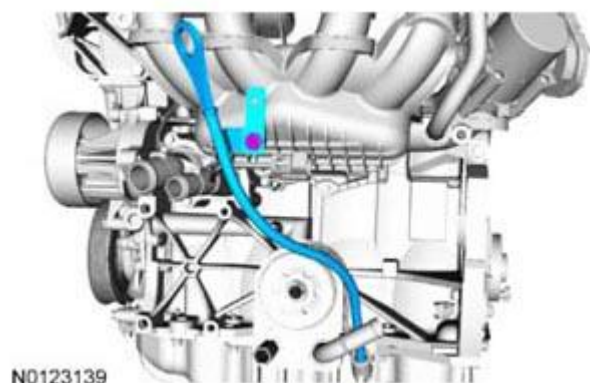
Identifying Oil Level Indicator Tube And Screw
